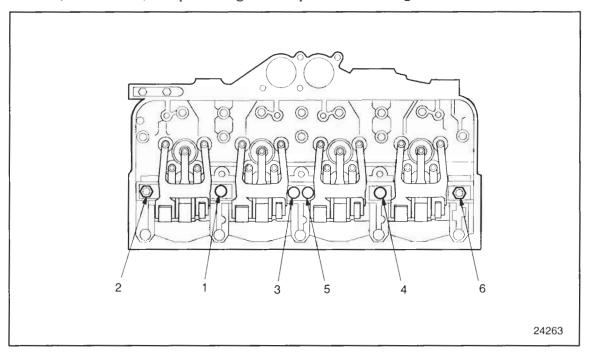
Rocker Arm Shaft Retaining Bolt and Nut Tightening Sequence
